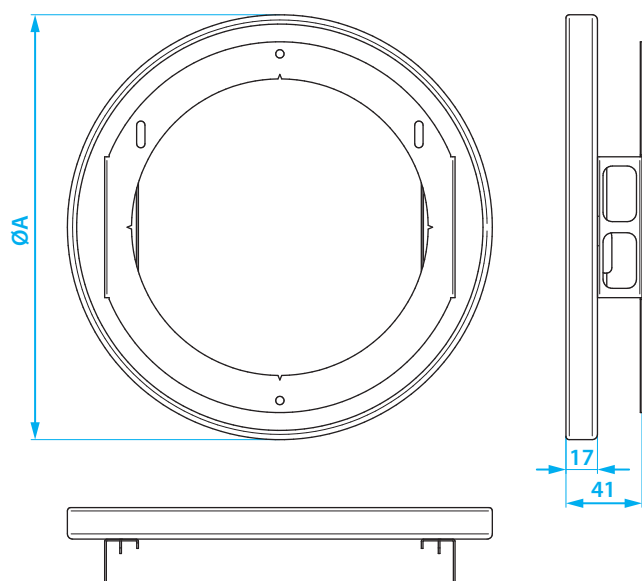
Dimensions, Econox grille typical example shown together with fixing frame
